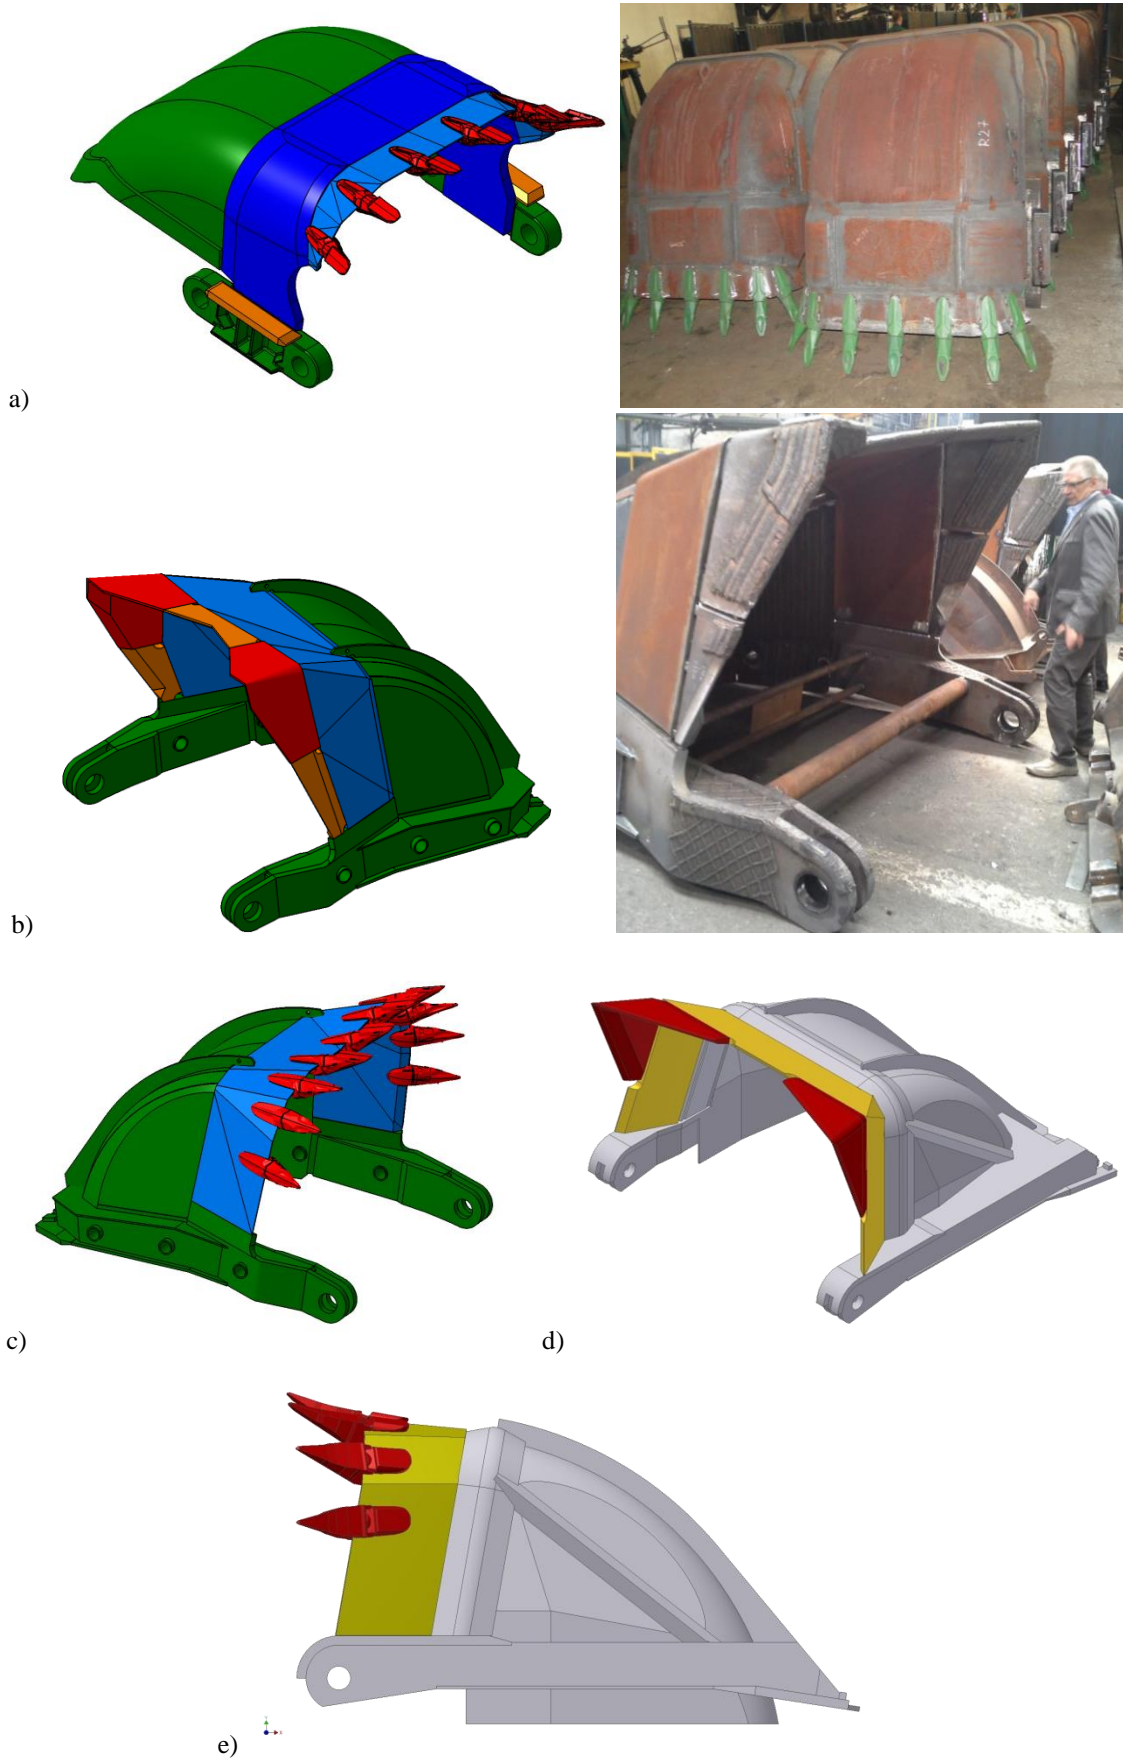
2. New buckets for bucket wheel and bucket chain excavators a)ERs710, b) and c)SchRs4000, d) & e) SchRs4600
